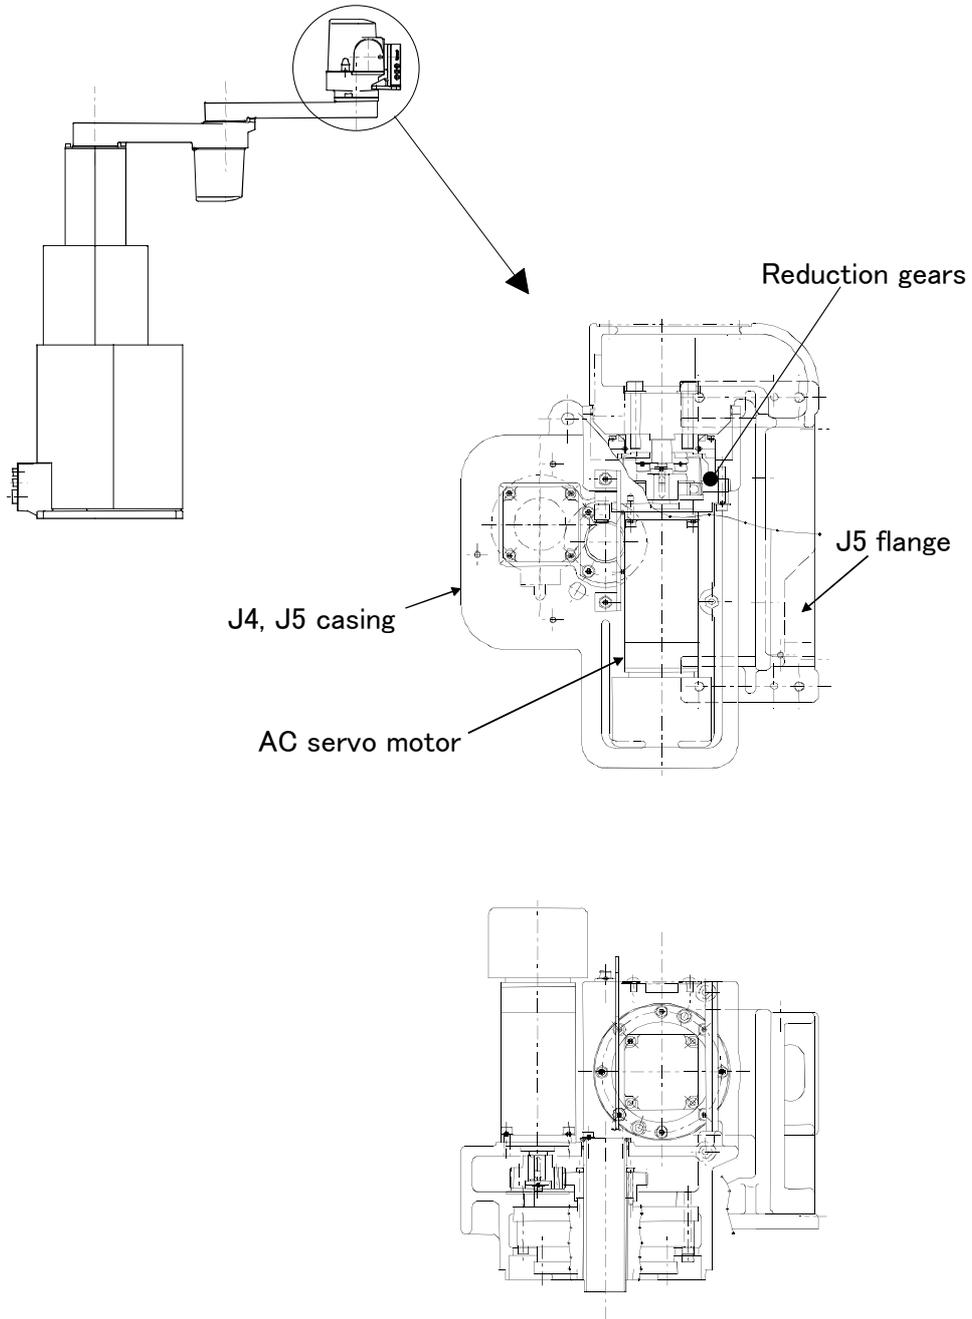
J5 axis drive mechanism(RH-1000GJDC-SA)
